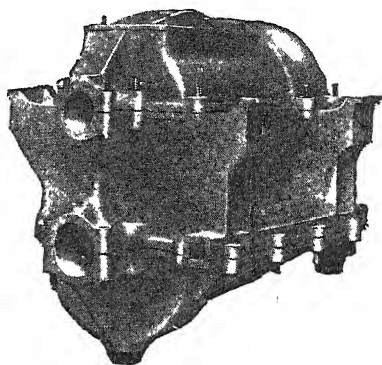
This shows the aluminium gearbox after repair by Scientific Welding. This repair cost a mere fraction of the price of a new part, and was fully guaranteed.
